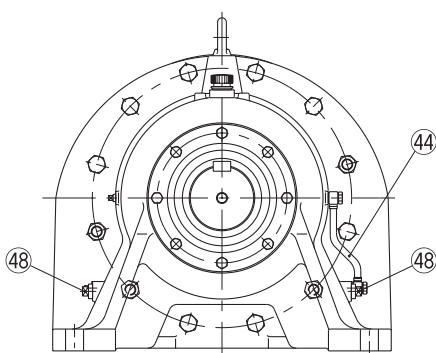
Type CHHM (Horizontal, Gearmotor) Single reduction
